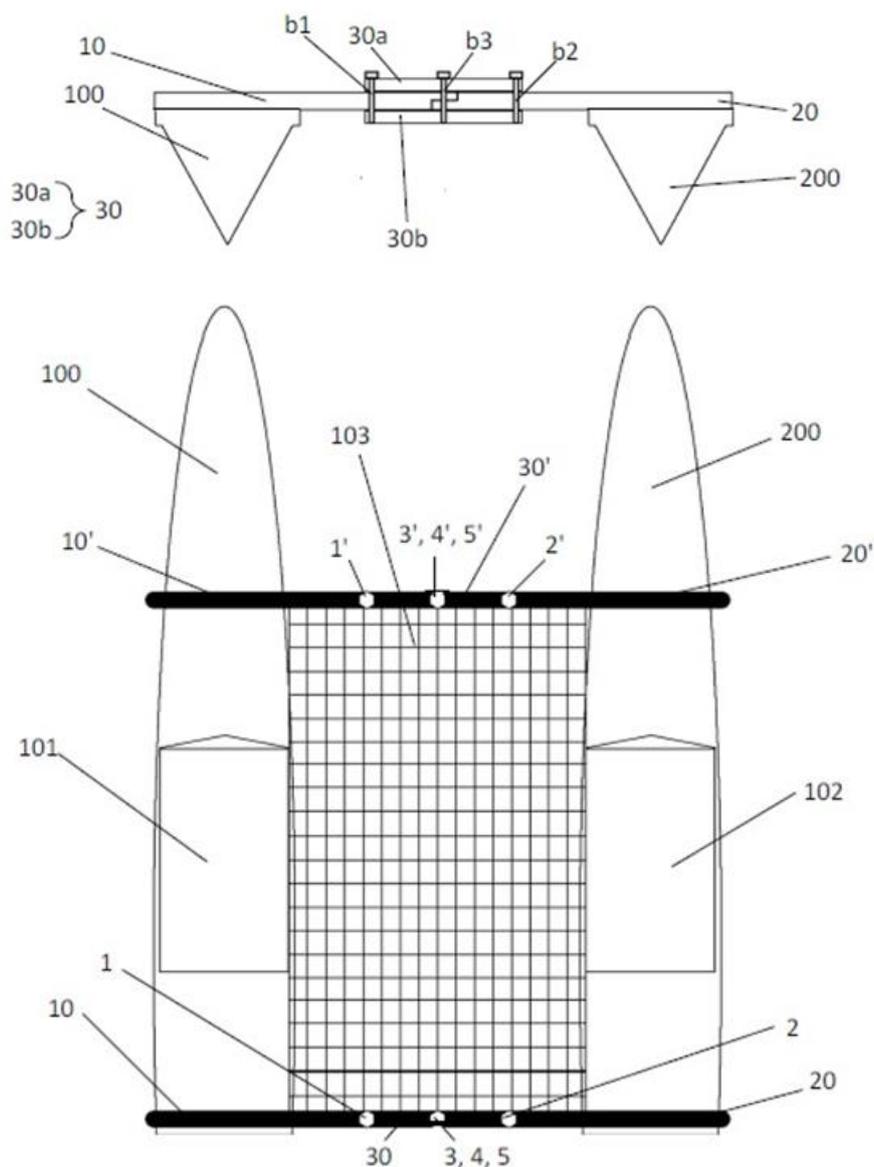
Folding assemblies when folded out, top and side view (see text)
